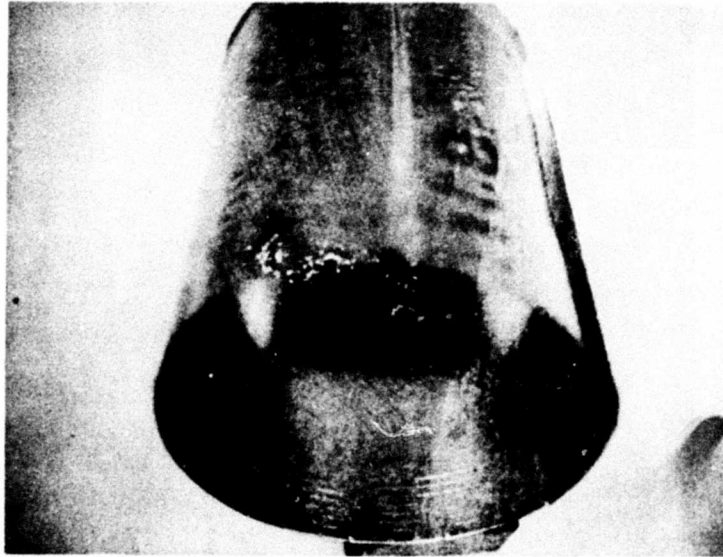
End of sheet metal sleeve from Skinner pipe-clamp sample in which conduit remained secure during lateral-stress test--showing scoring by conduit threads.
